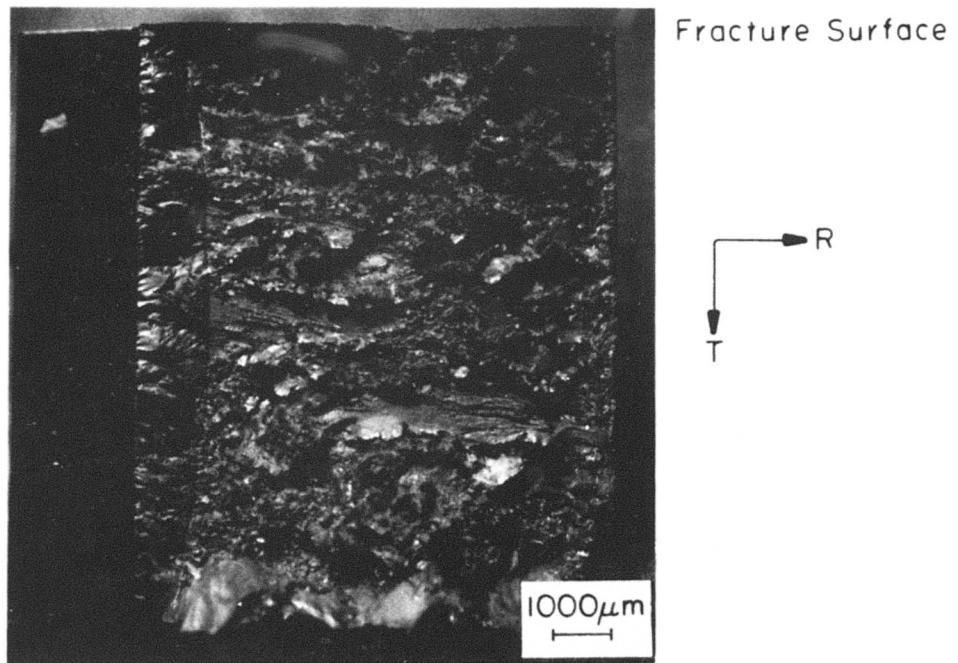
Alloy 334, sample 4ELR10. Fracture surface X8, crack path X500.
